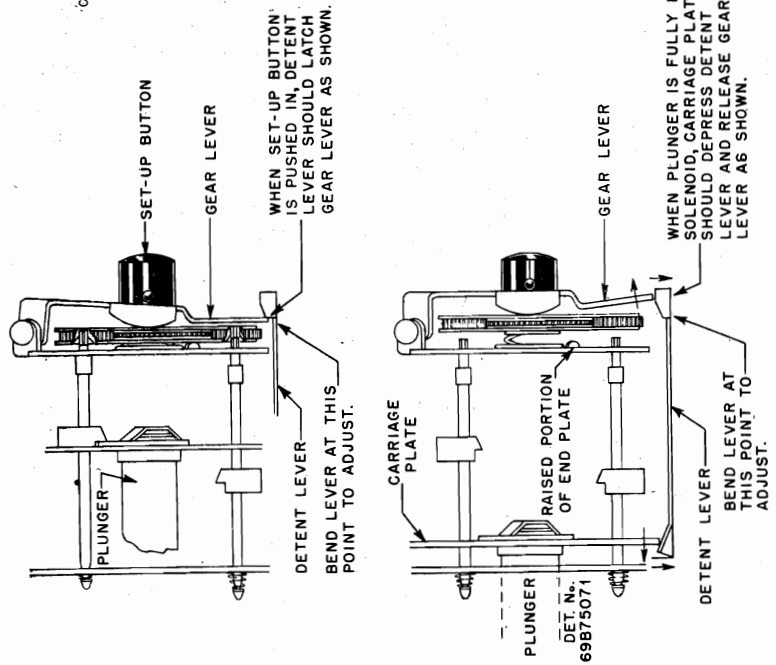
GEAR LEVER LATCH ADJUSTMENT
